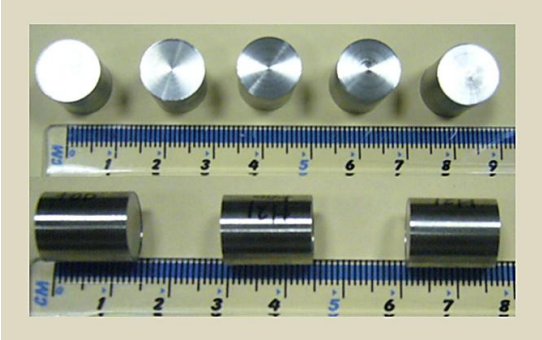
Some axisymmetric compression samples without visible casting defects.
